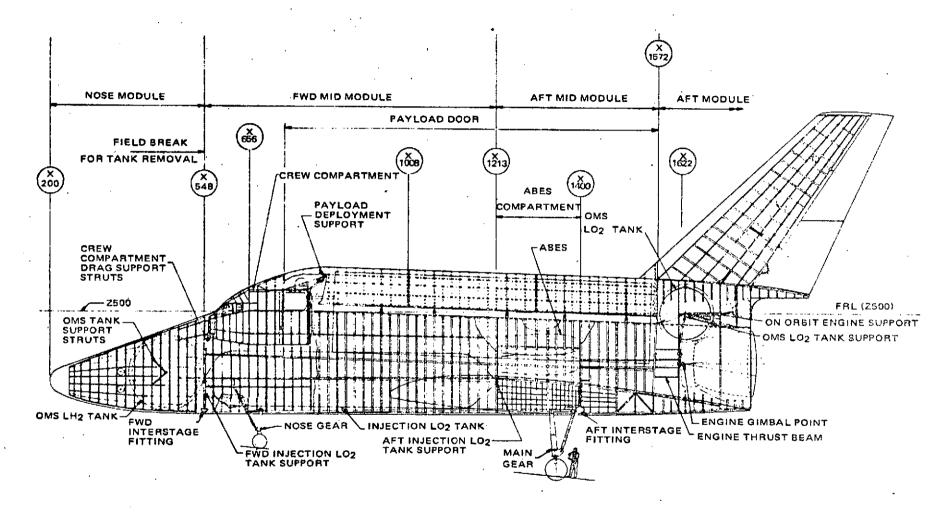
H-3T Orbiter — Structural Arrangement
